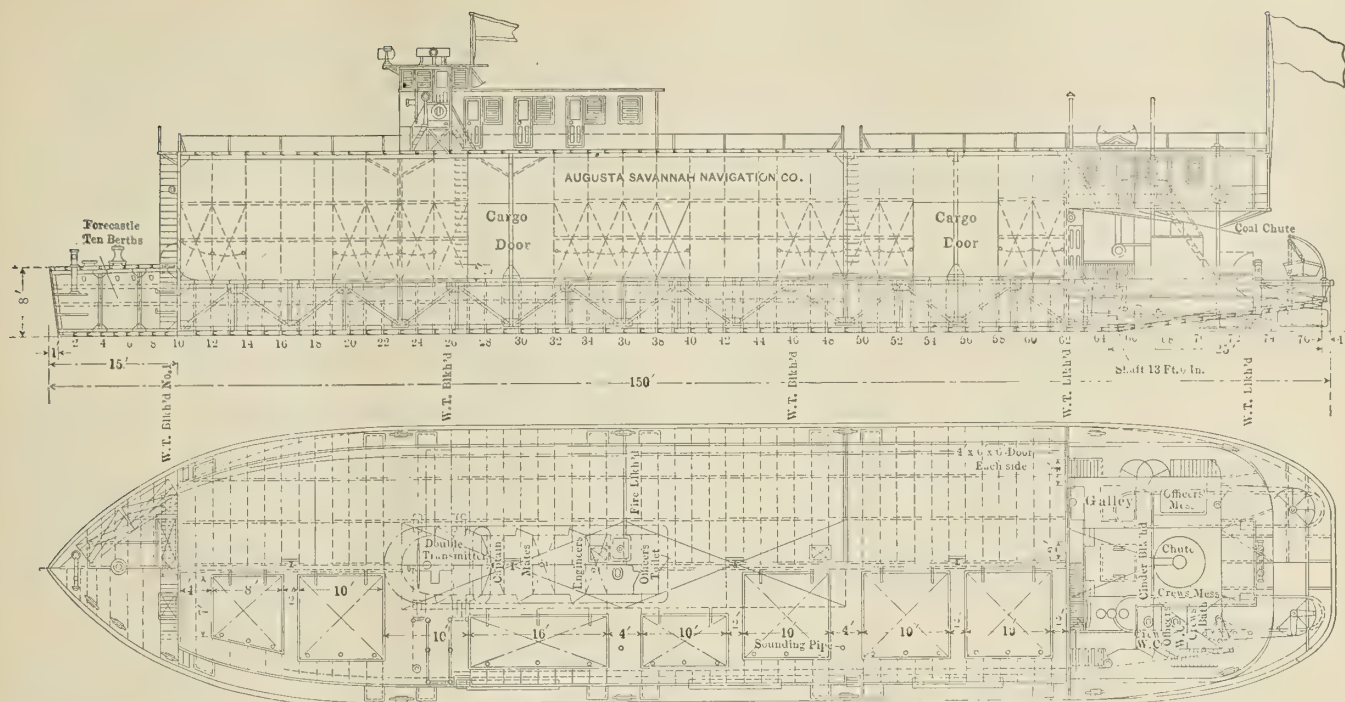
Inboard Profile, Half Plan and Half Section of Savannah Barge
